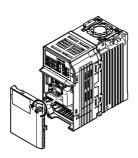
Remove the Front Cover on an IP20/Open-Chassis Drive
